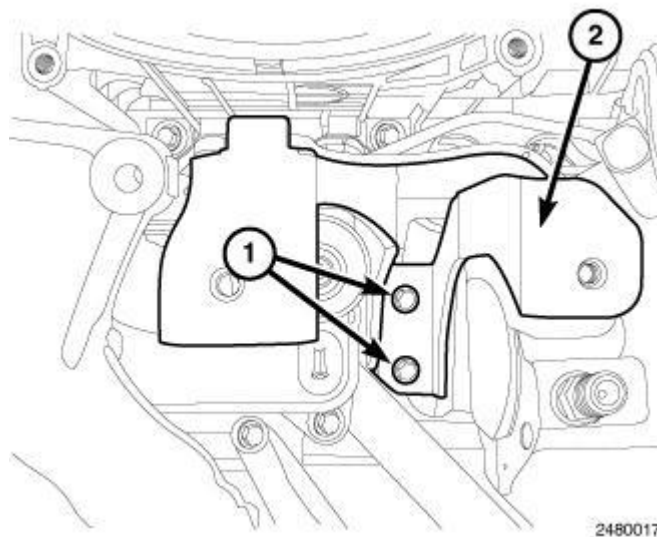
EGR Vacuum Solenoid & Bolts
